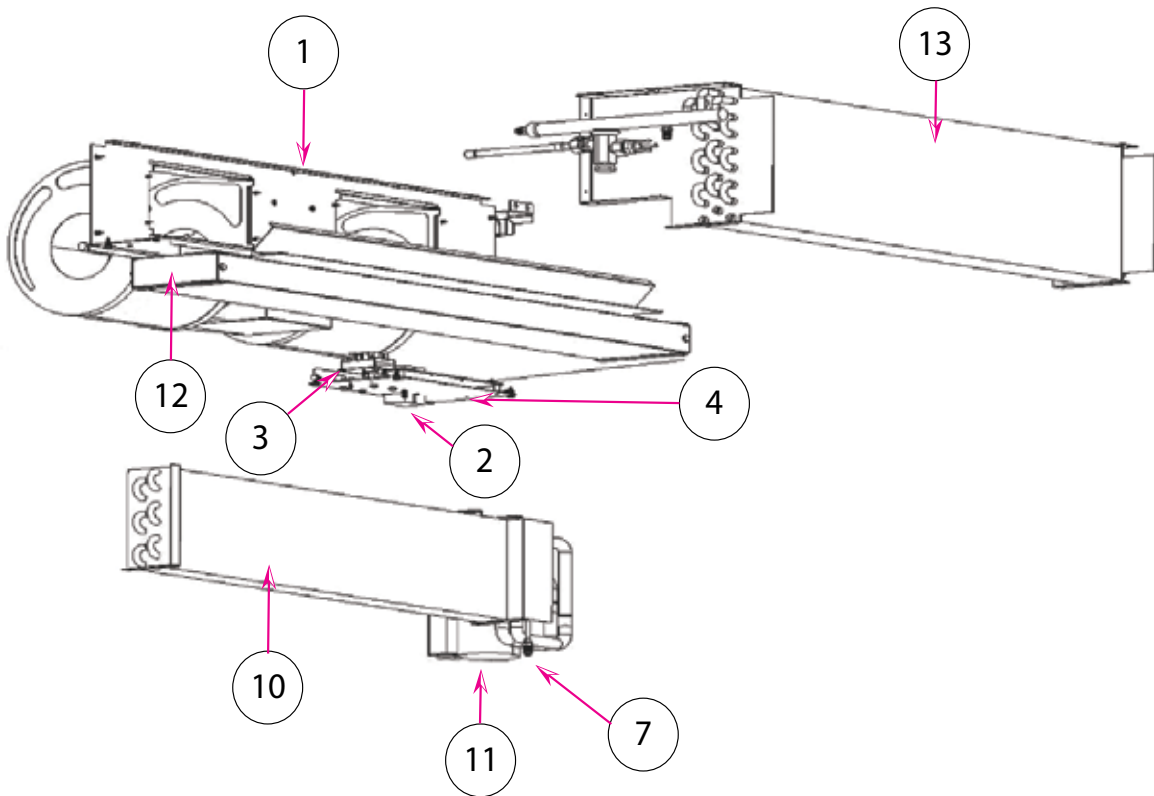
HE*2/ HE*4-*-AA Hydronic Heat Air Handler Replacement Parts Schematic
